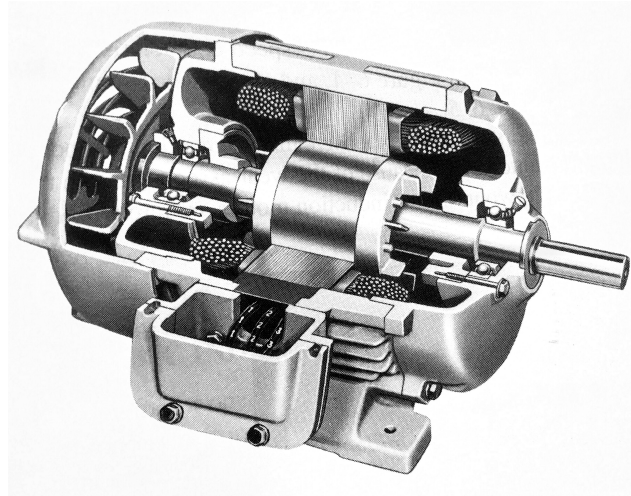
Section view of a small squirrel cage induction motor [9].
